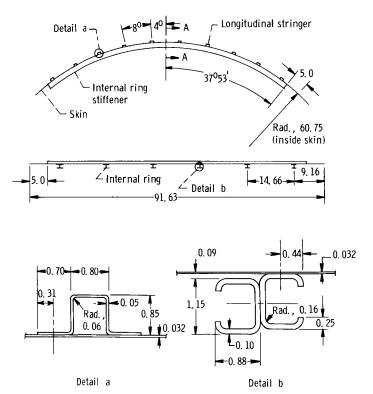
Structural configuration of quarter-section Langley wind tunnel flutter test specimen.
